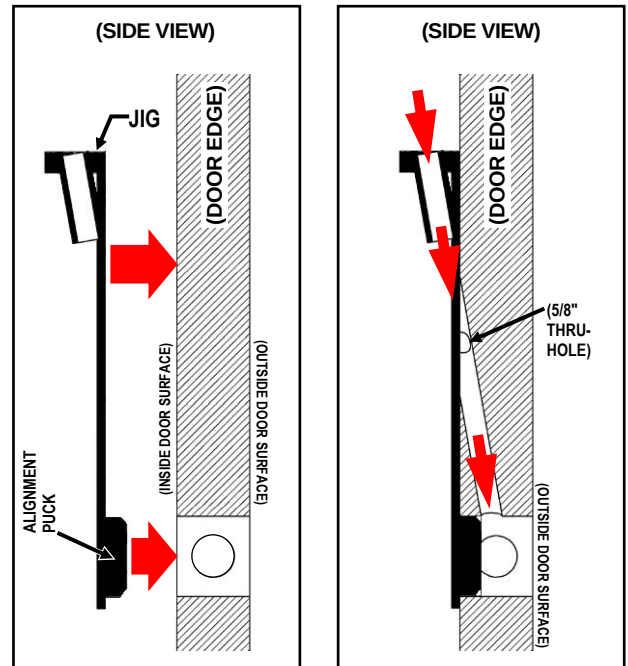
JIG IS INSERTED INTO THE INSIDE ("PROTECTED") SIDE OF THE DOOR. VIEW AT RIGHT SHOWS HOLE PATH
